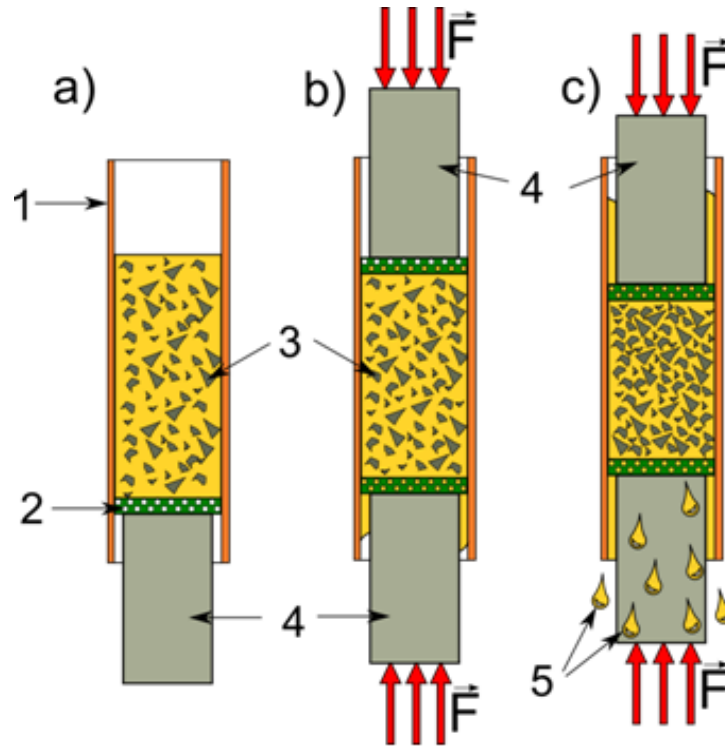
Methodology for preparing composite samples with a high volume fraction of Terfenol-D particles, where: 1 - container, 2 - filter, 3 - mixture, 4 - aluminum rods, 5 - excess resin
